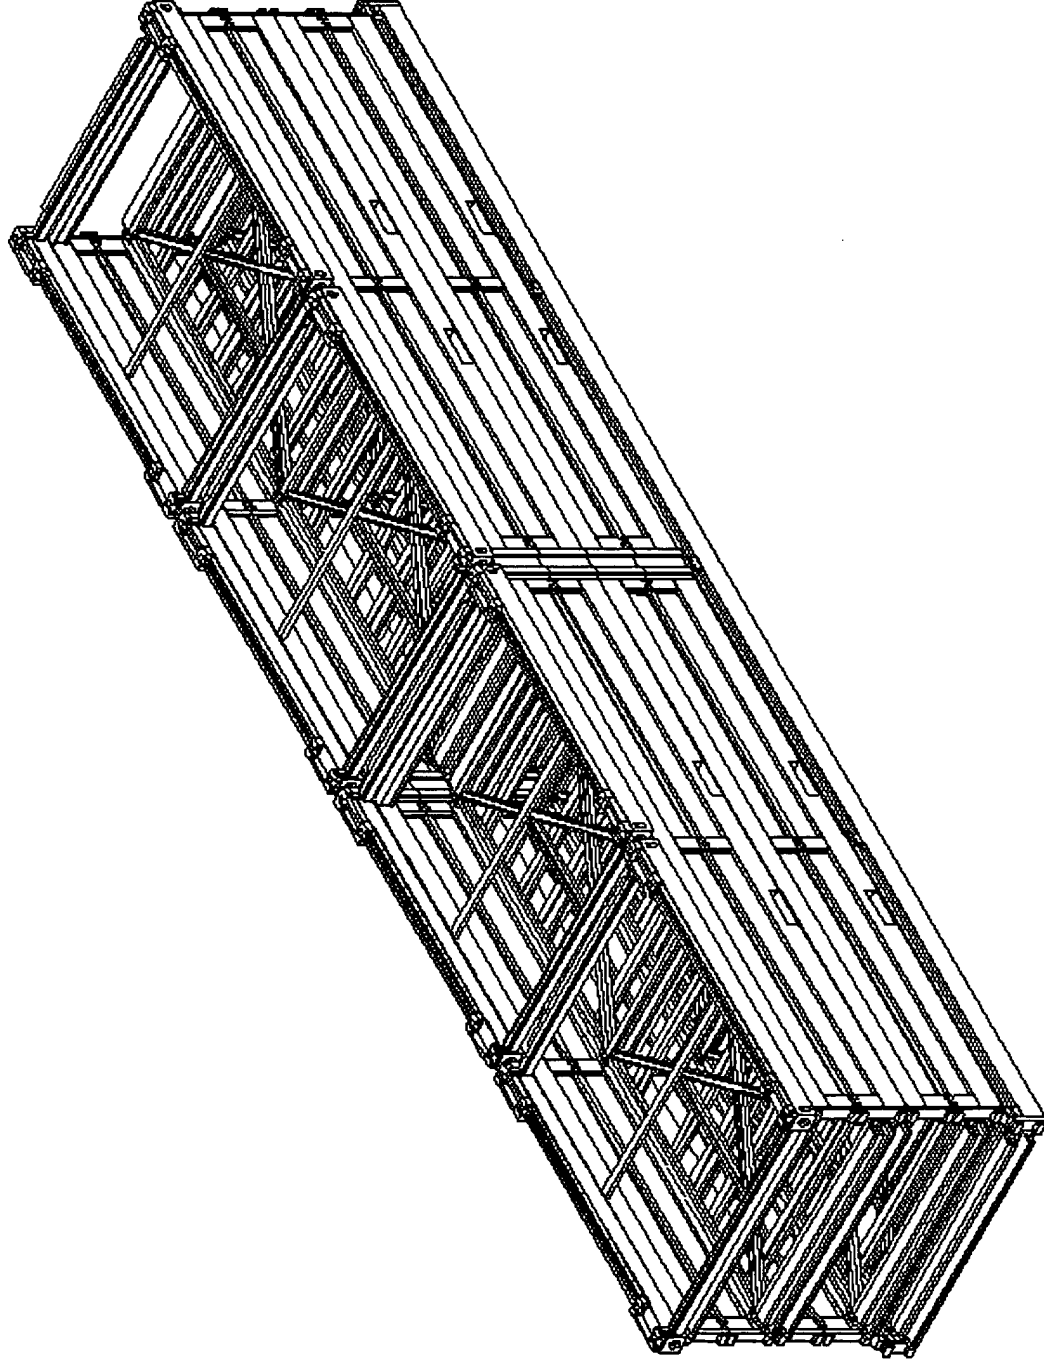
D: Step4 of disassemble and load process: The left and right frames from 2 disassembled 20 foot high cube collapsible cargo containers are stacked on top of the previous assembly.
